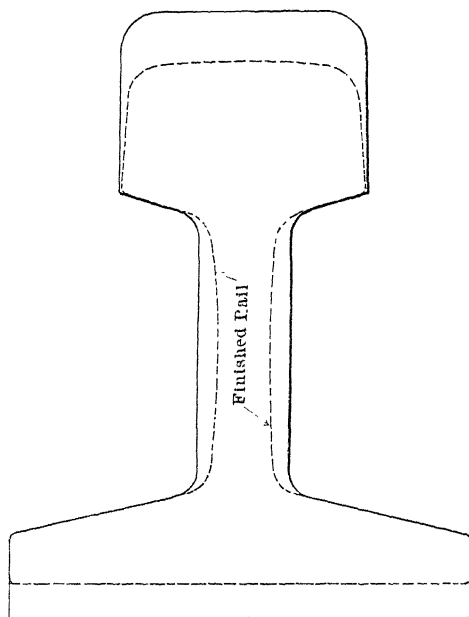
BLANK FOR UNIVERSAL MILL.
